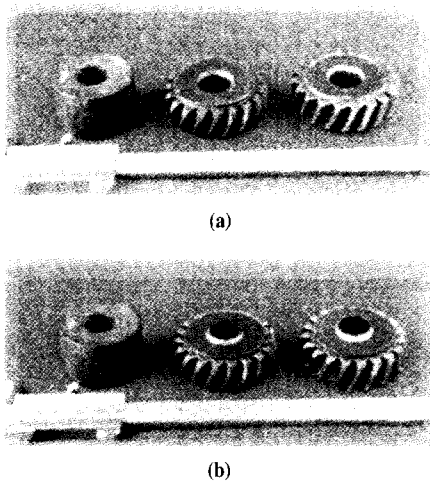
Preform, intermediate and final workpieces of helical gear forging
